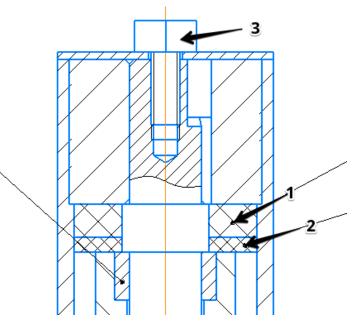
Mixer sealing rings: 1 – PTFE ring; 2 – Rubber sealing ring; 3 – Fixing screw bolt
